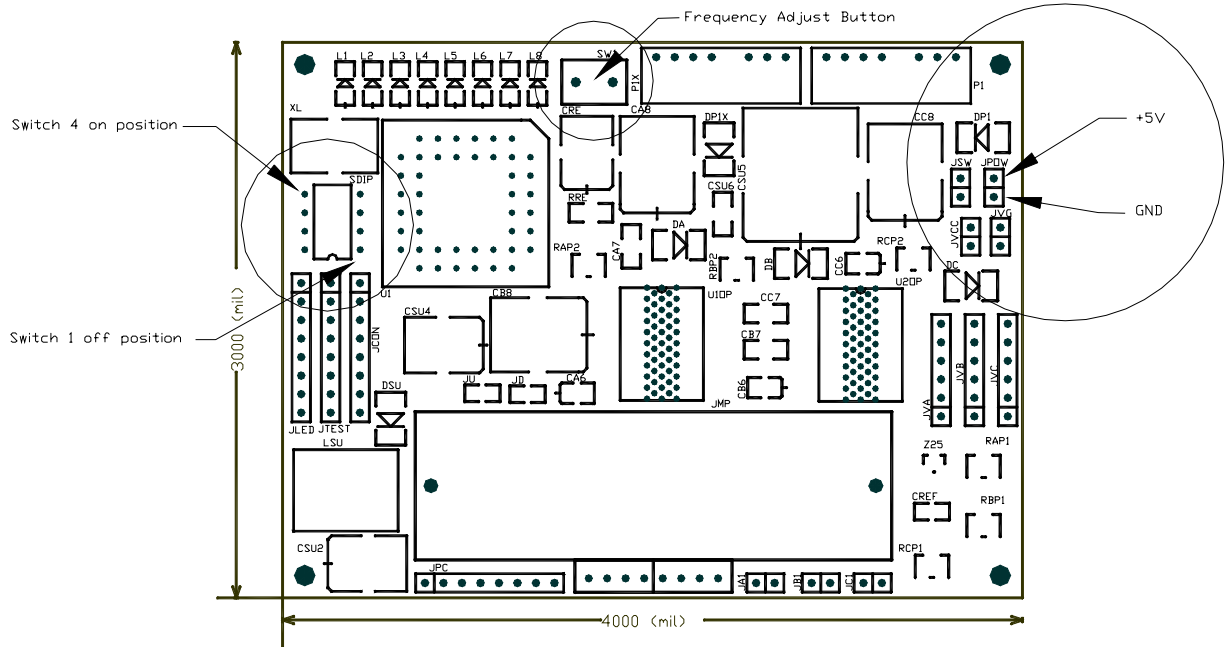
Circuit board layout showing the DC power connector location on the driver board (Top View).
